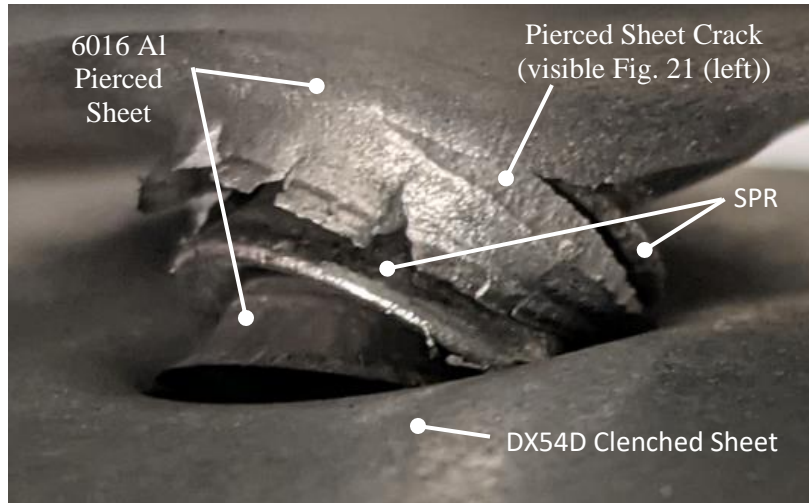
Al 6016 1mm by DX54D 0.95mm SPR cross-tension post quasistatic test 45° partially separated joint details
